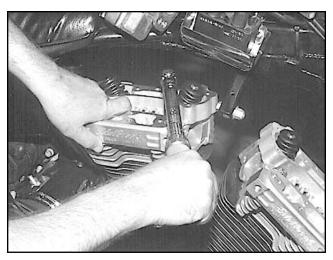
Torque head bolts in sequence with a good quality torque wrench
